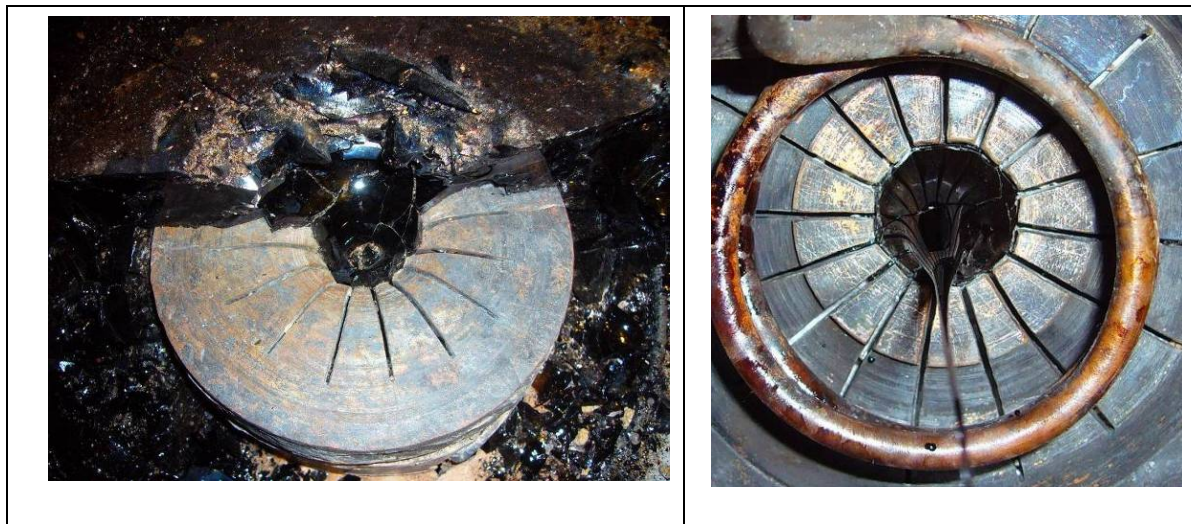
Top and bottom views of the drain device after multiple tests and casting processes.
